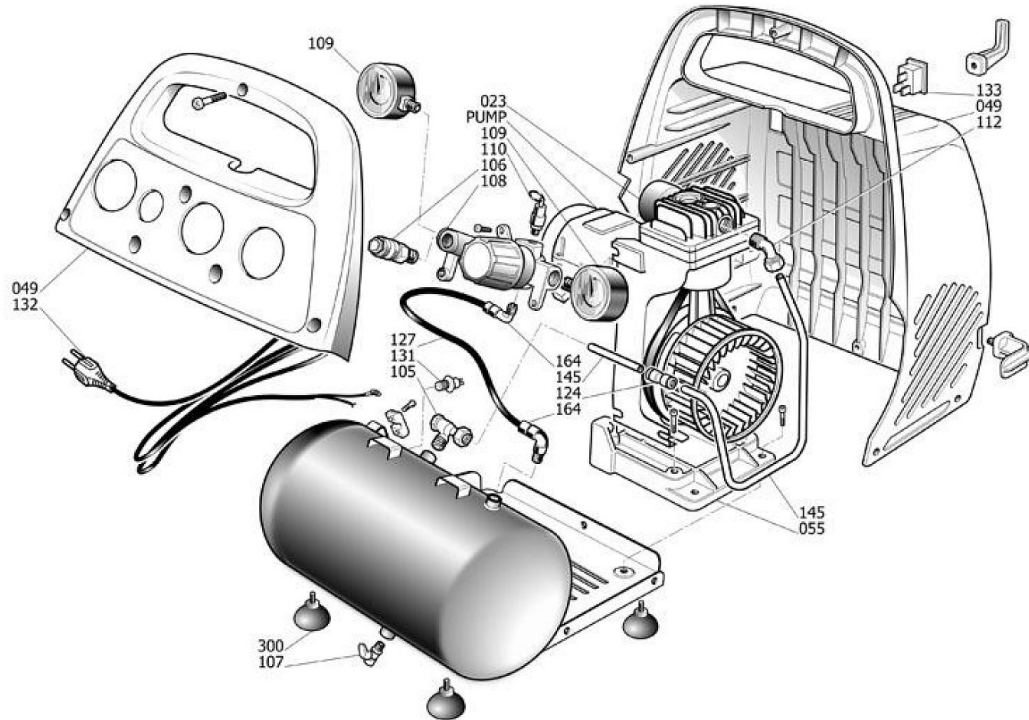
Spare parts drawing AIRBOY 186 OF E
